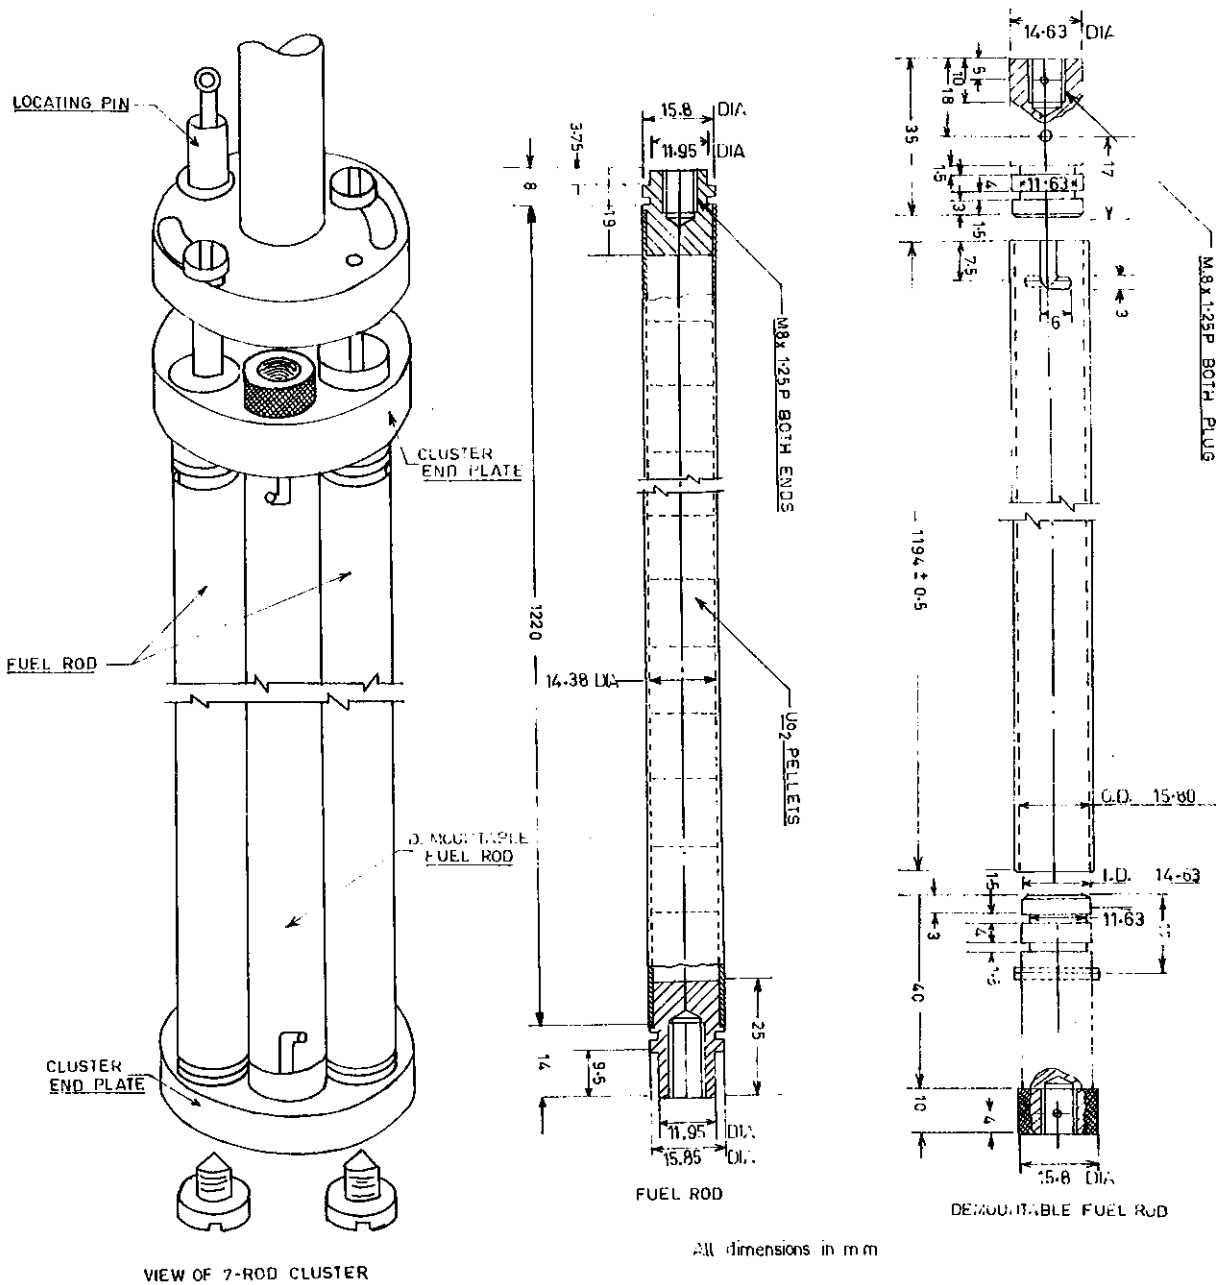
DETAILS OF FUEL RODS AND ASSEMBLY OF 7-ROD CLUSTER
